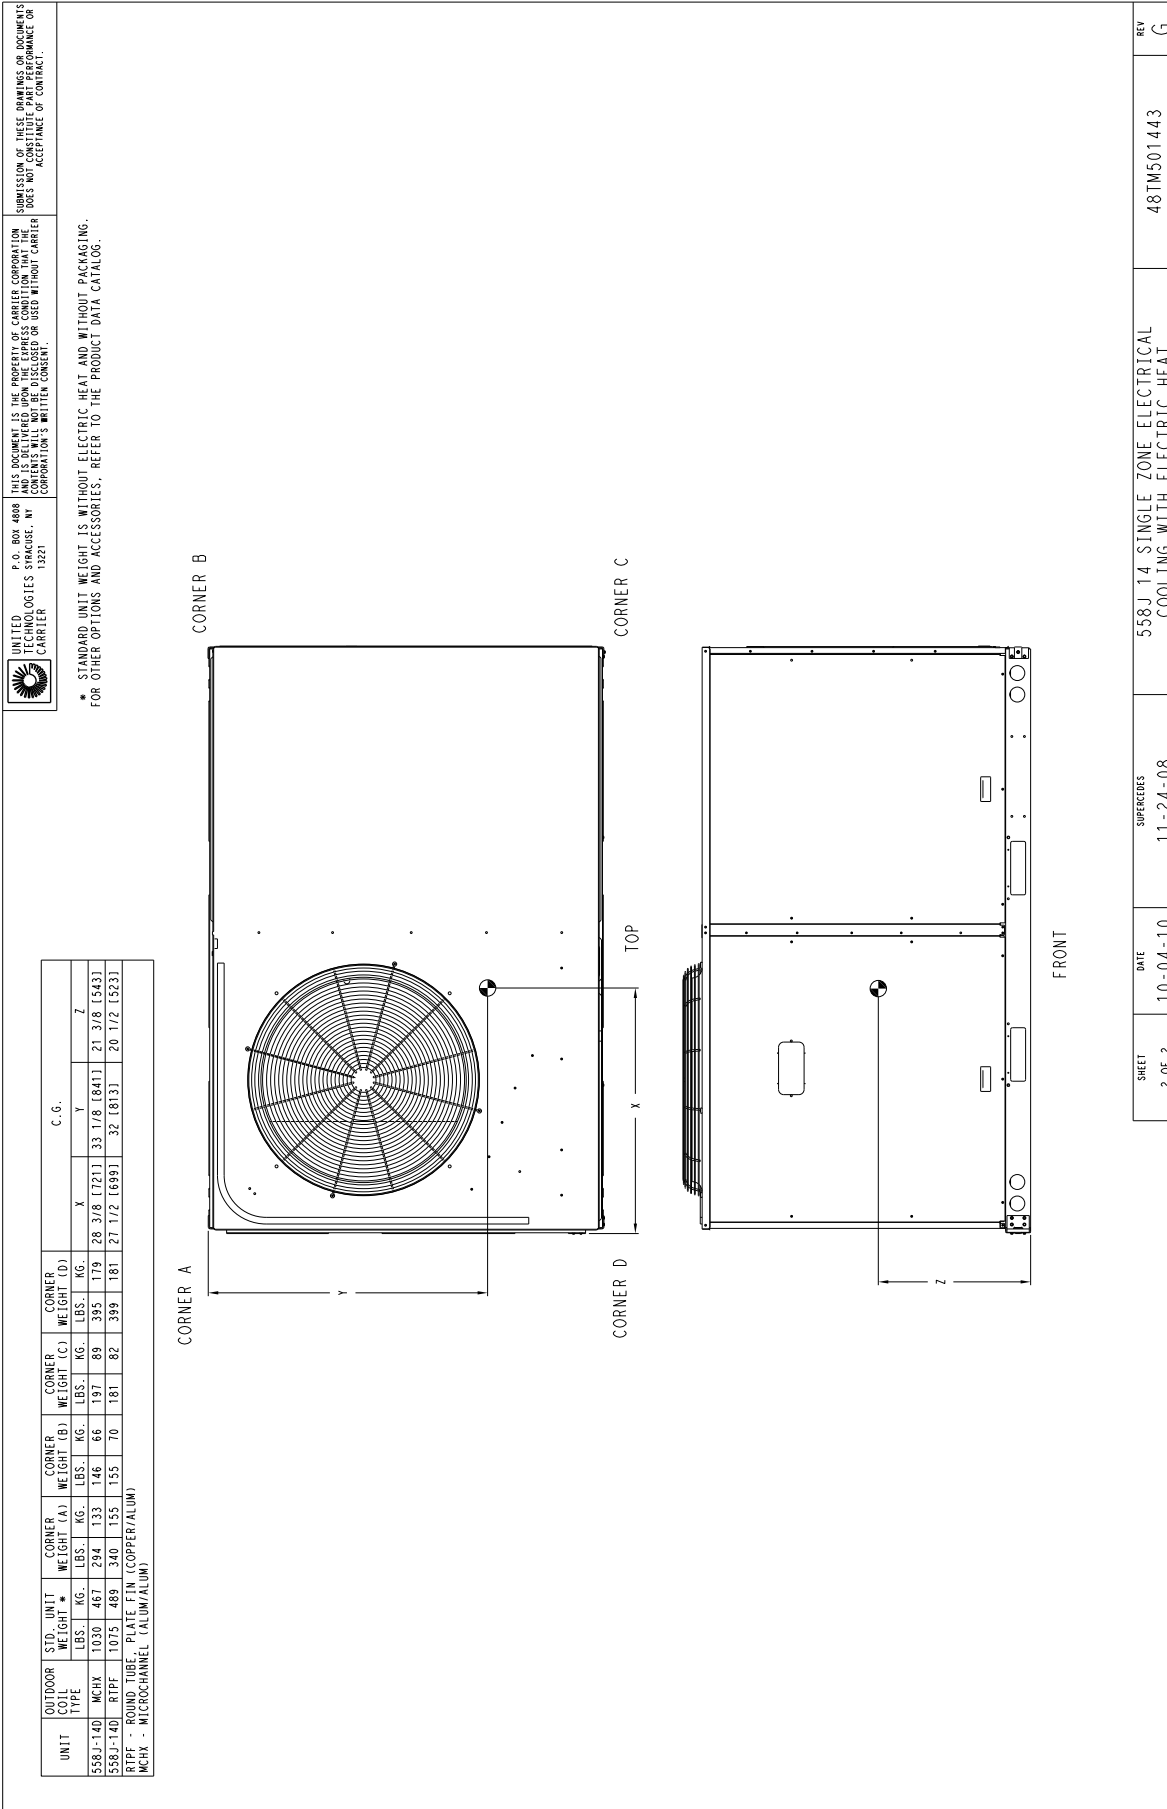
Dimensions 558J 14 (Sheet 2 of 2)
